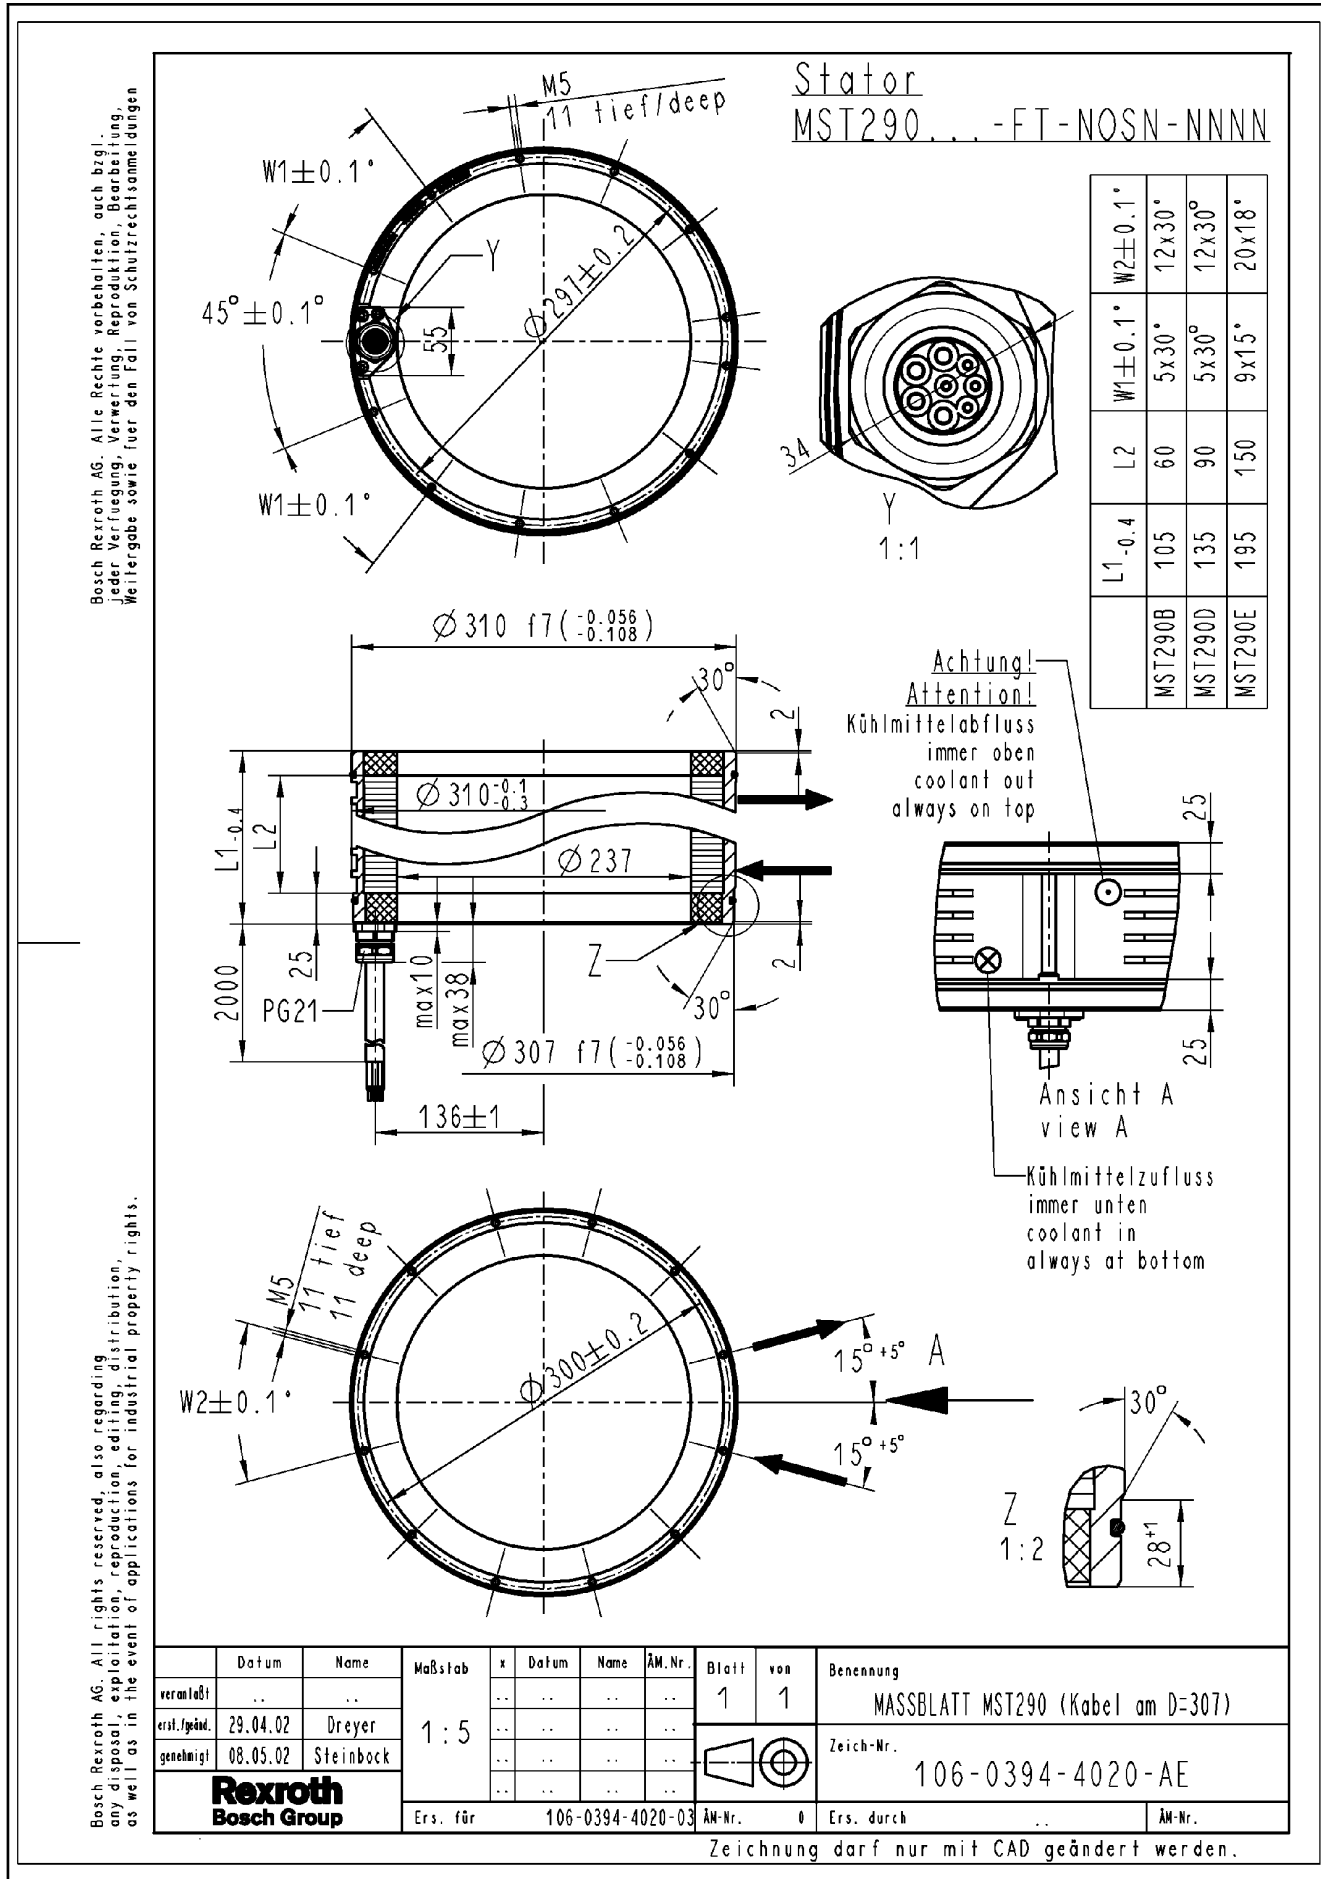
Dimension sheet MST290, electrical connection "SN"
